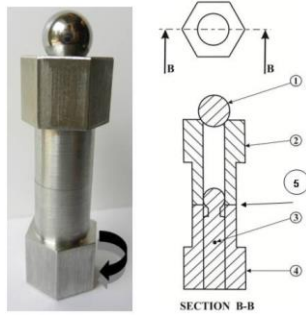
(a) Schematic view of the galling test arrangement (b) sectional view of the test configuration (1 ball bearing; 2 upper specimen; 3 alignment pin; 4 lower specimen; 5 contact surface).
